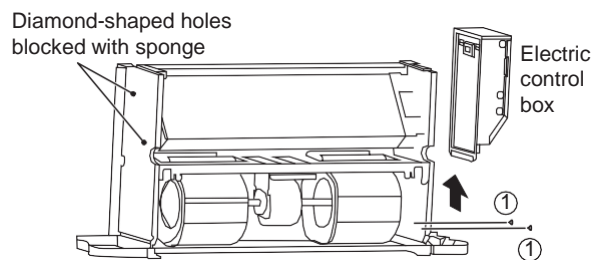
Removing the electric control box and blocking the diamond-shaped holes
